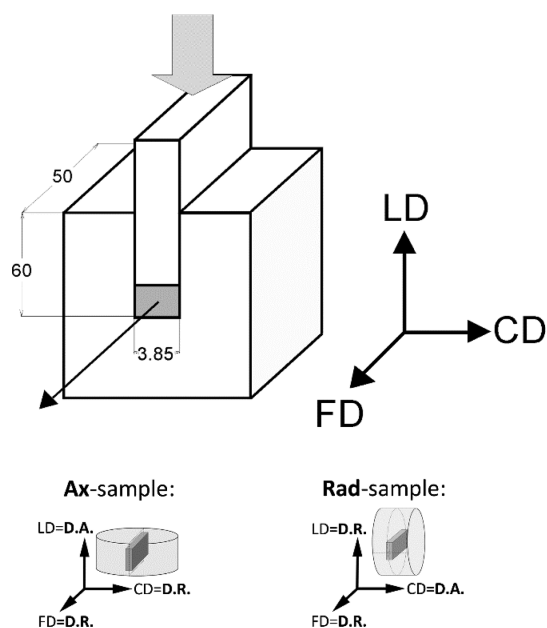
Schematic drawing of the channel-die tool used for plane-strain compression. The compressed sample is marked gray. LD, CD, and FD denote the loading direction, constrained direction, and flow direction, respectively. Dimensions were given in millimeters. The sketch at the bottom illustrates the orientation of the Ax- and Rad samples with respect to the channel-die.
